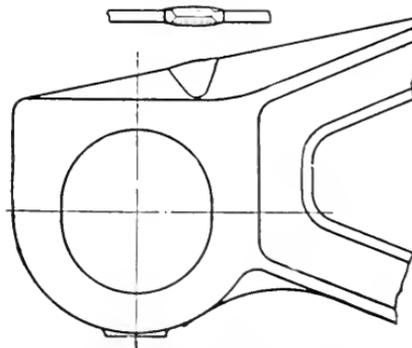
Steel Side Truck Frame Prepared for Electric Welding
